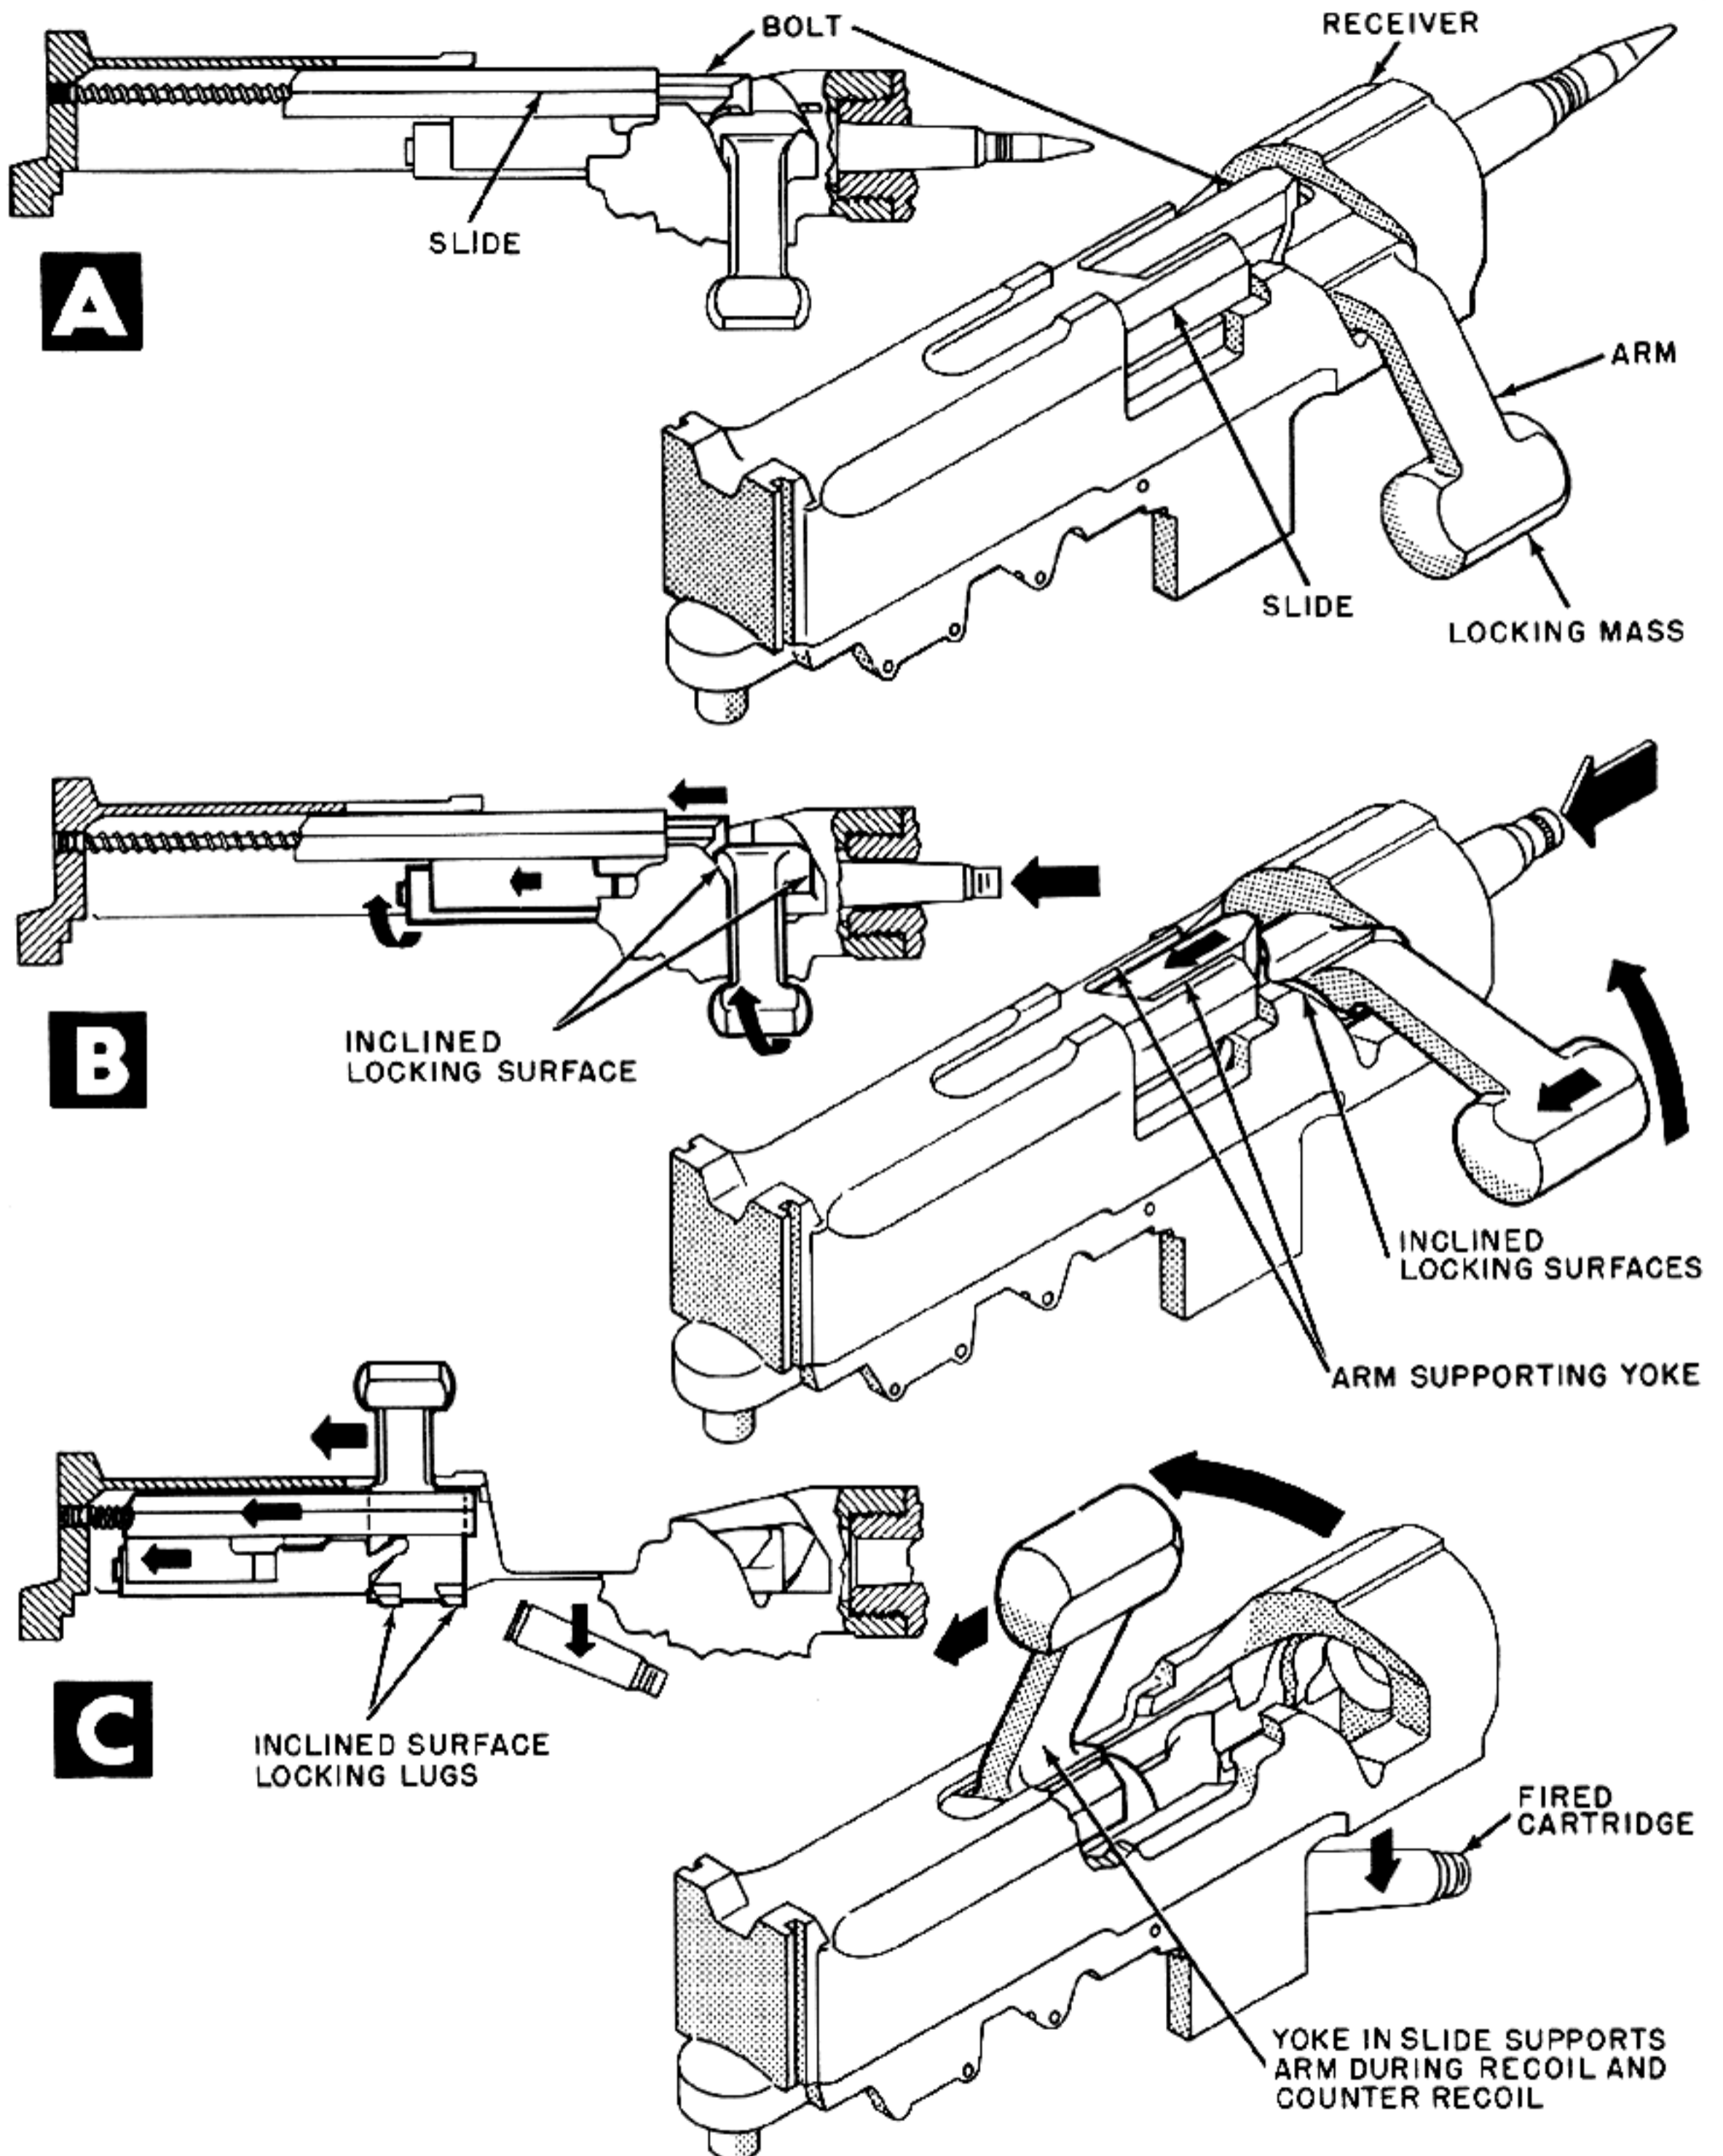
Gas Pressure on Inclined Surfaces Force Locking Mass and Bolt to Unlocked Position.
